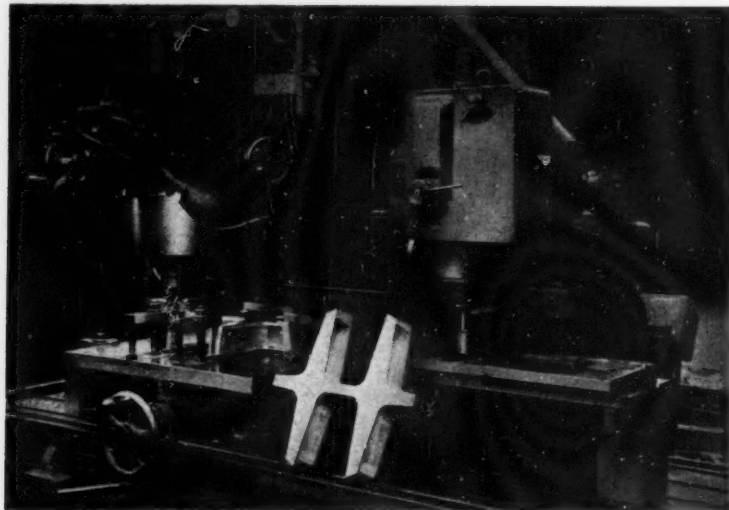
Hydro-Tel machine set-up for the final contour milling operation on a spider gimbal which is machined from a solid block of aluminium
